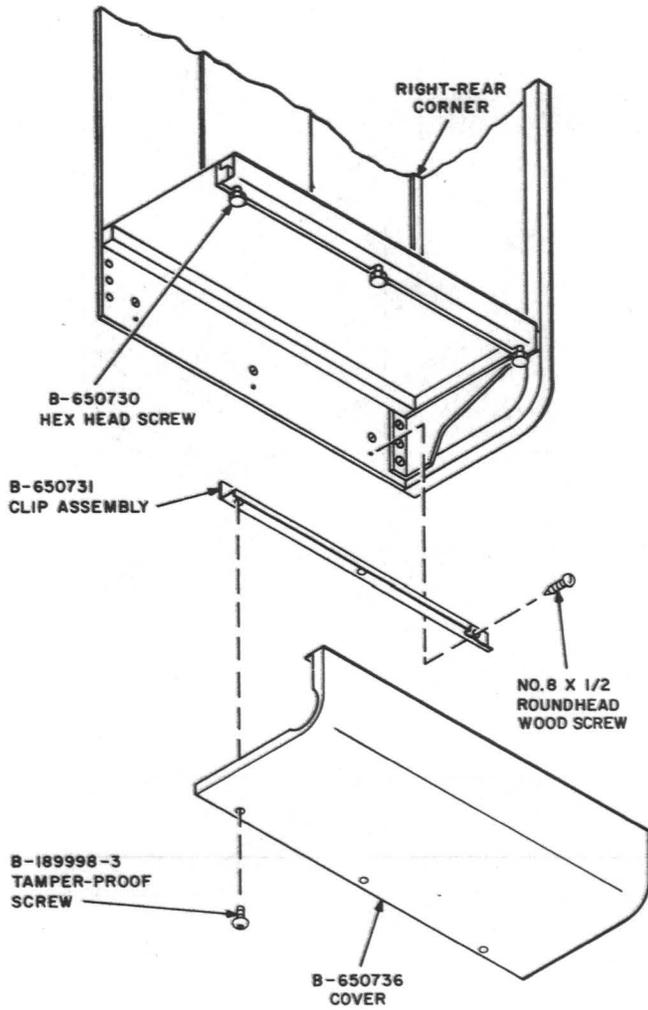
Assembly of KS-19267, List 13 Cover Assembly
